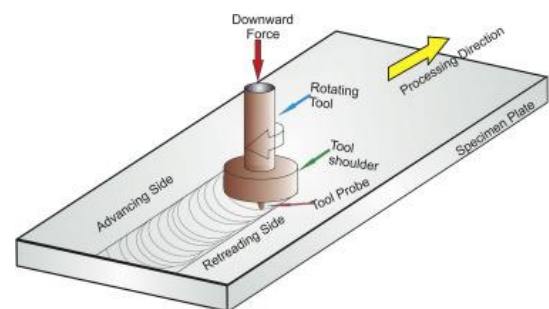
Illustration of Friction Stir Processing technique.[10]
